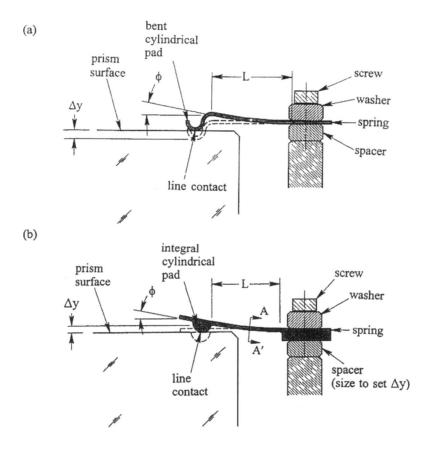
Configurations of a cantilevered spring-to-prism interface with. (a) The spring bent into a convex cylindrical curve and (b) an integrally-machined cylindrical pad.
